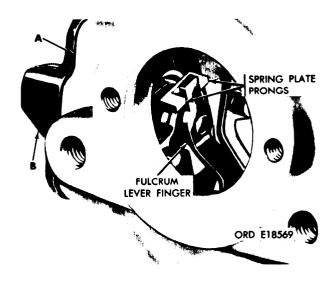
Installing operating shaft bearing and associated parts in governor housing.
